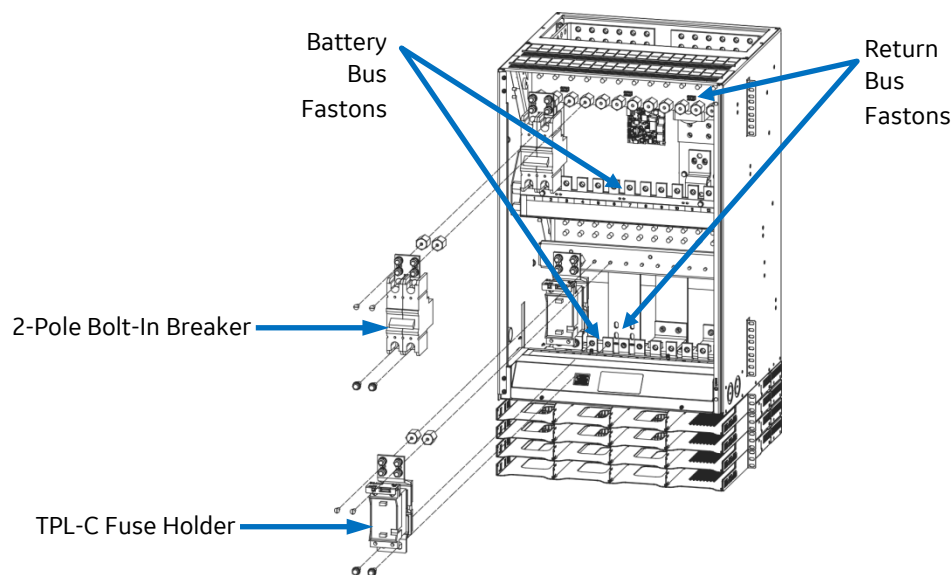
Bolt-In Breaker or Fuse Holder Mounting
